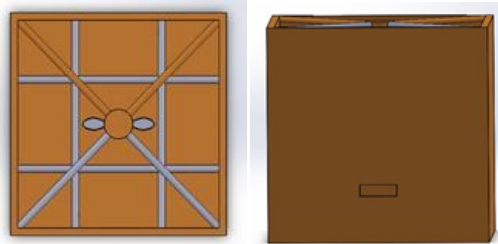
Top View and Right Side View of Open Circuit DC Wind Tunnel
